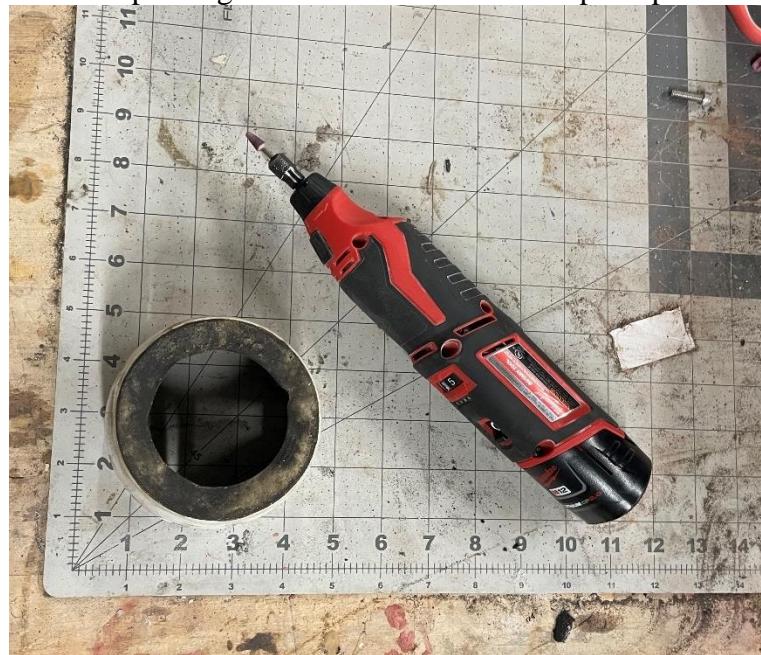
Electrical Dremel tool used to bore larger nozzle diameter
